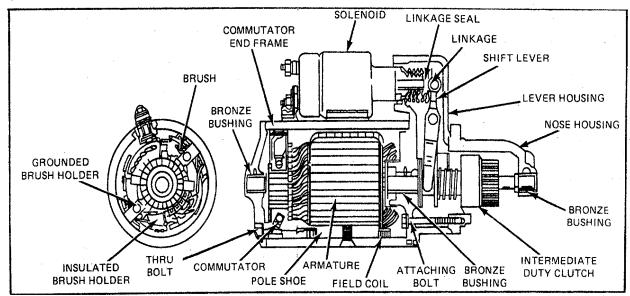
Cross-Section of Motor with Intermediate-Duty Clutch
